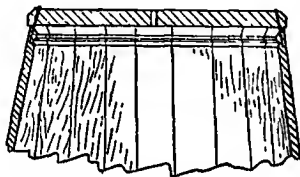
Section of the top of a barrel showing method of fixing board to top
